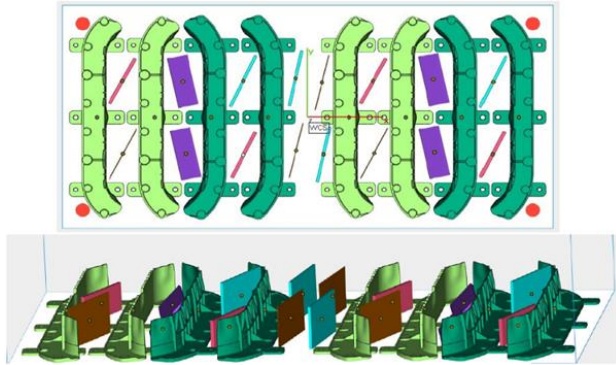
Layout of the Build Plate for subcomponent manufacturing.
